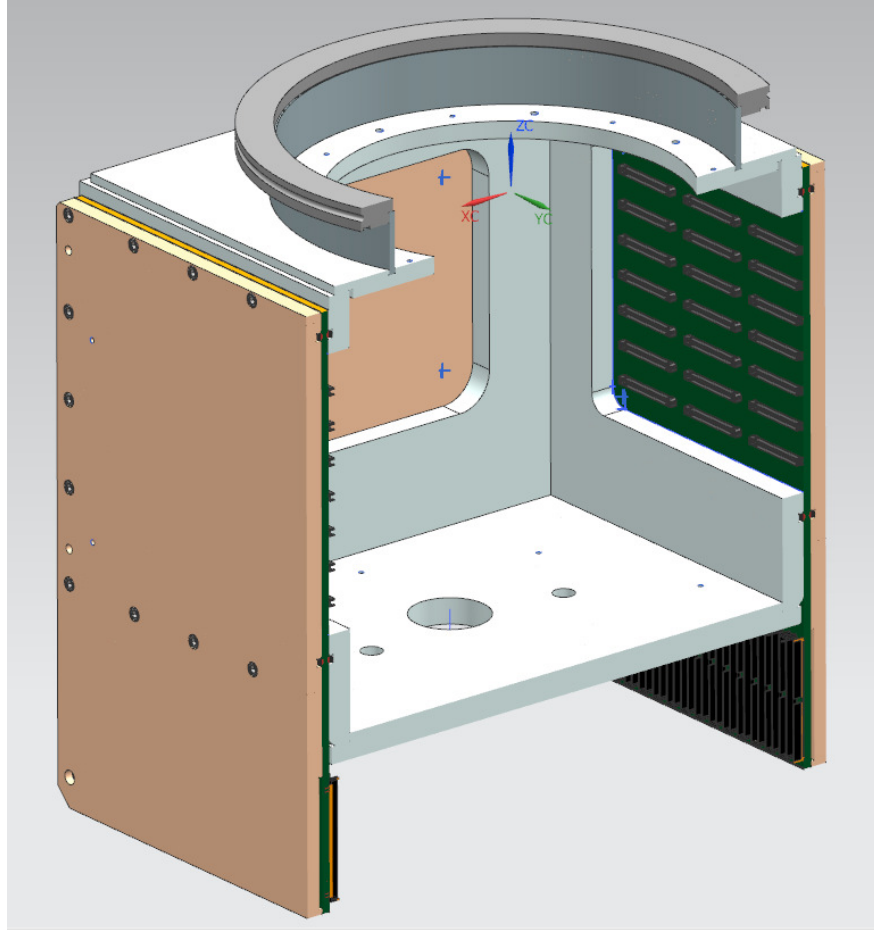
Vacuum interface board (VIB) shown mounted on the lower vessel weldment
